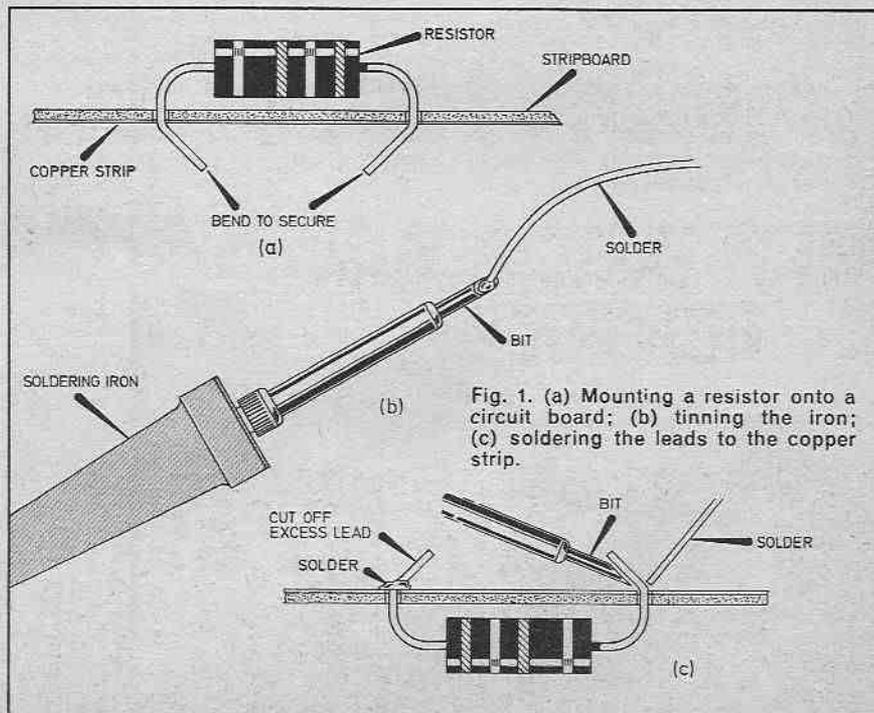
(a) Mounting a resistor onto a circuit board; (b) tinning the iron; (c) soldering the leads to the copper strip.
